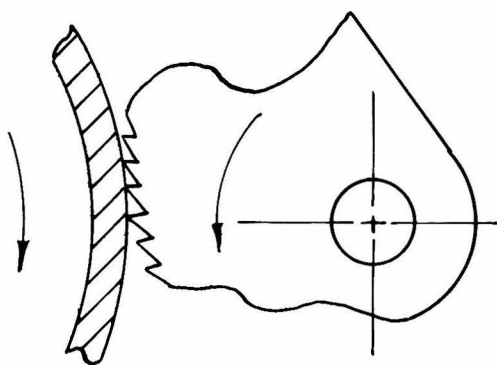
ROTATING-WEDGE CHUCK JAW TEETH SHAPE.
